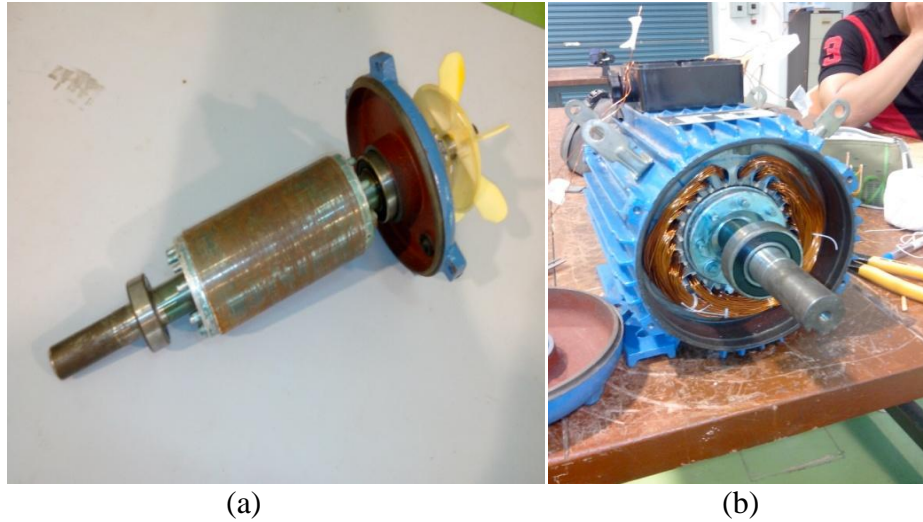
(a) Squirrel cage rotor. (b) Completely winding in the stator with rotor inside that
